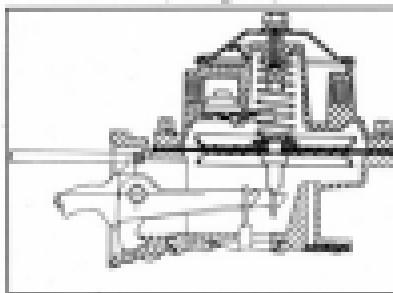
Holding Diaphragm in Position with Tool while Assembling Diaphragm Cover.
